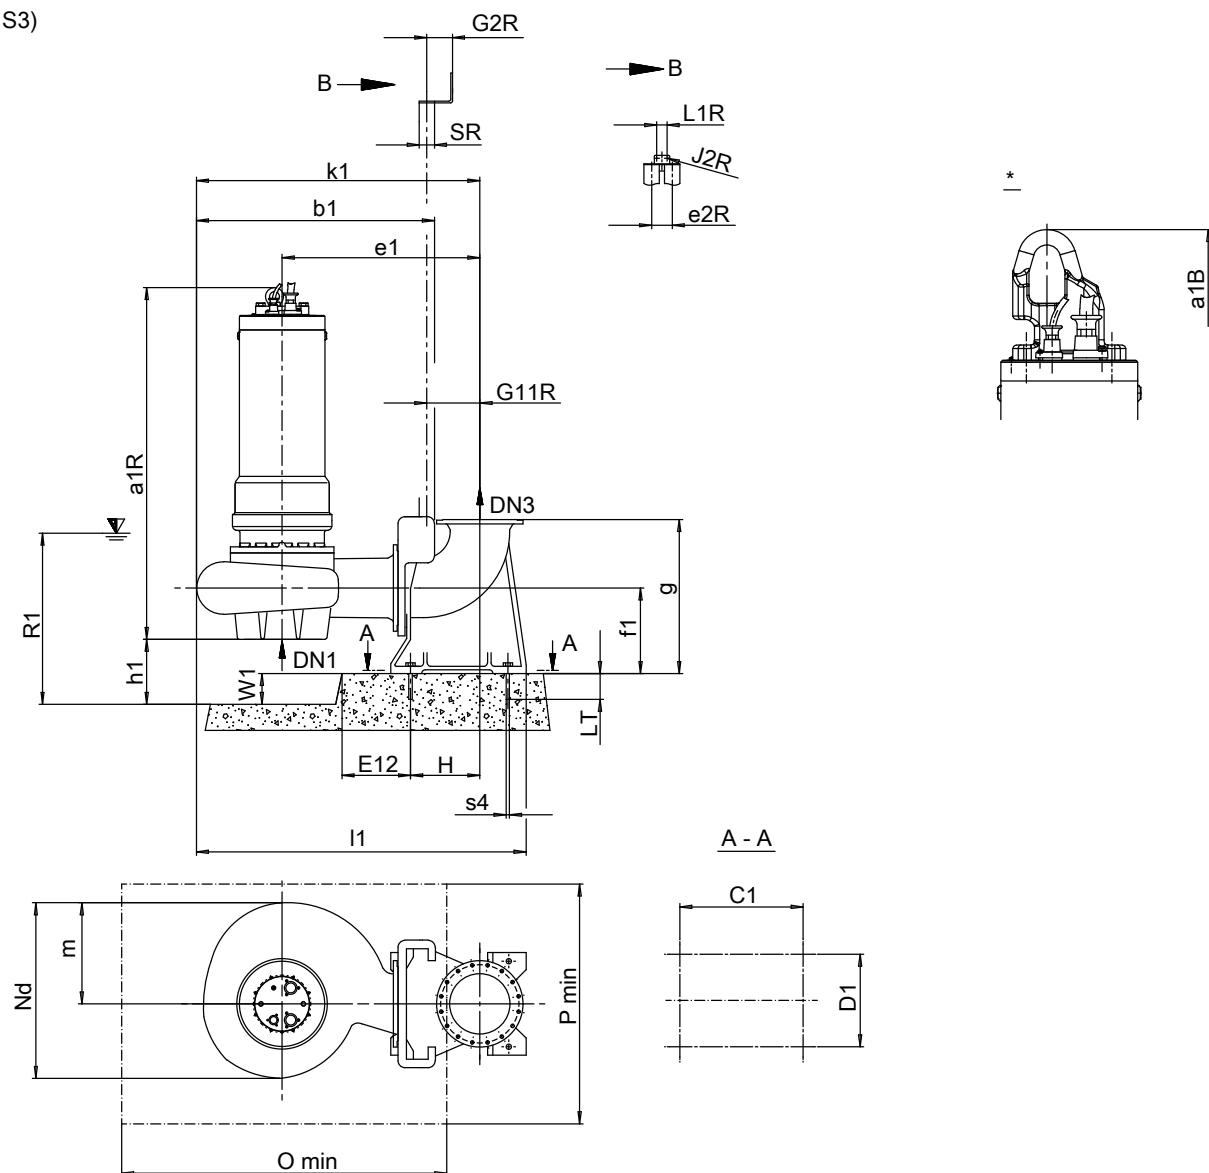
General arrangement drawing S3, stationary on duckfoot bend, guide rail arrangement, foundation with step, without foundation rail, small upper holder, motor version N
